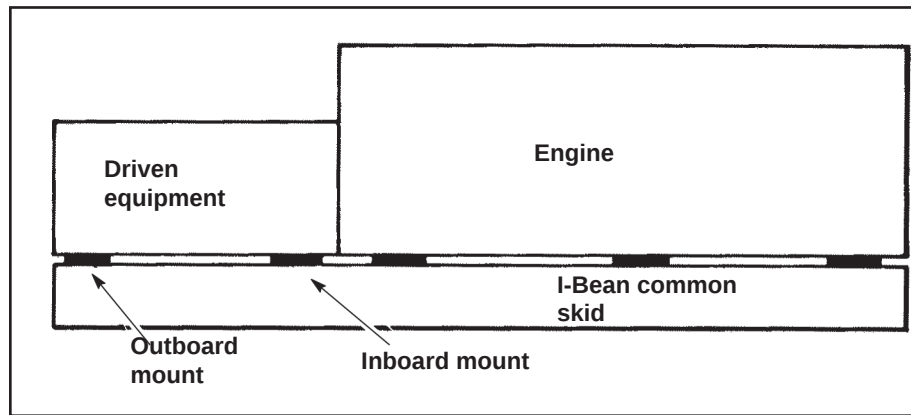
Add Or Remove Shims From The Mounts On Each End Of The Machine To Make Vertical Adjustments
